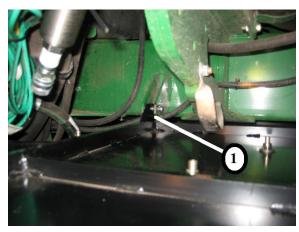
Deflector Shield Installation Key 1 – Pin and Cotter Pin
